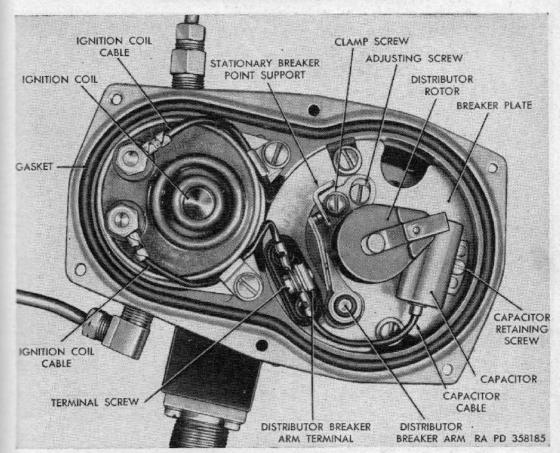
Distributor and ignition coil assembly-distributor cover removed.
